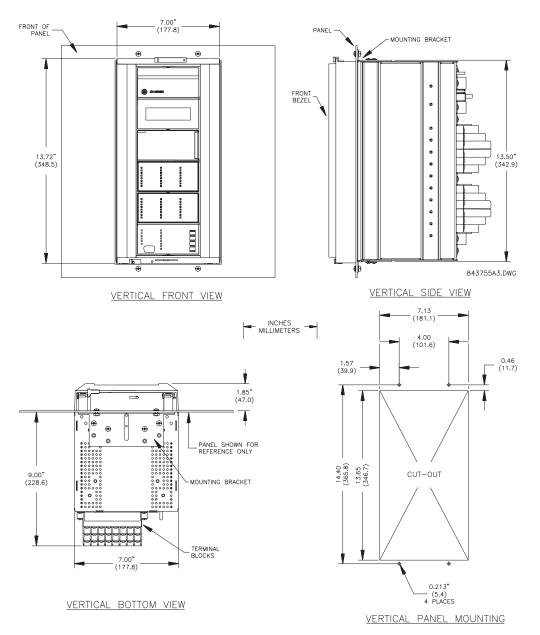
D30 VERTICAL MOUNTING AND DIMENSIONS
